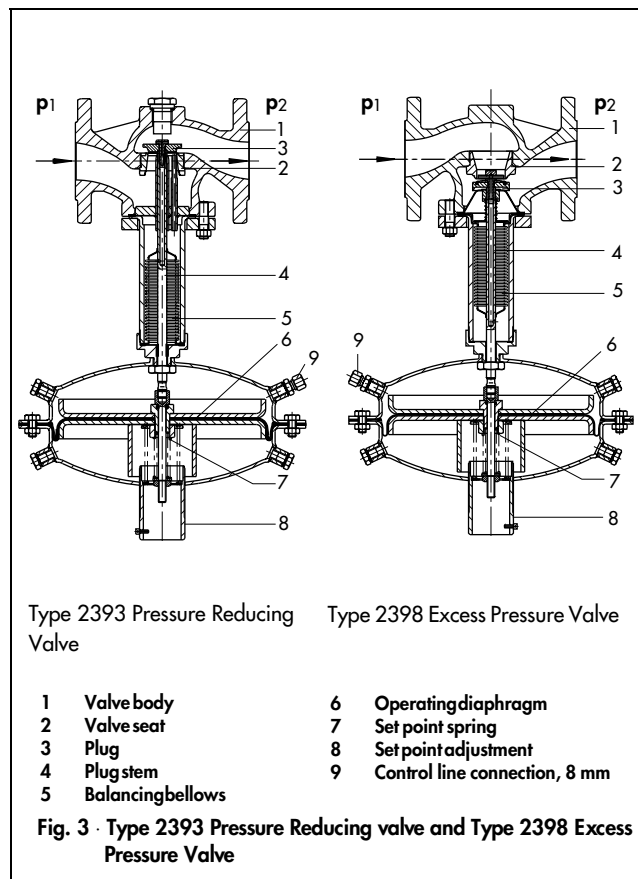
· Type 2393 Pressure Reducing valve and Type 2398 Excess Pressure Valve
